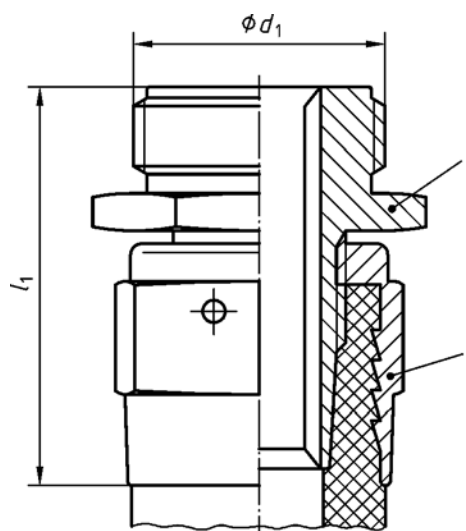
to 8 are examples only. The dimensions of hose fittings with screwed ferrules shall be in accordance with Tables 1 to 7.
